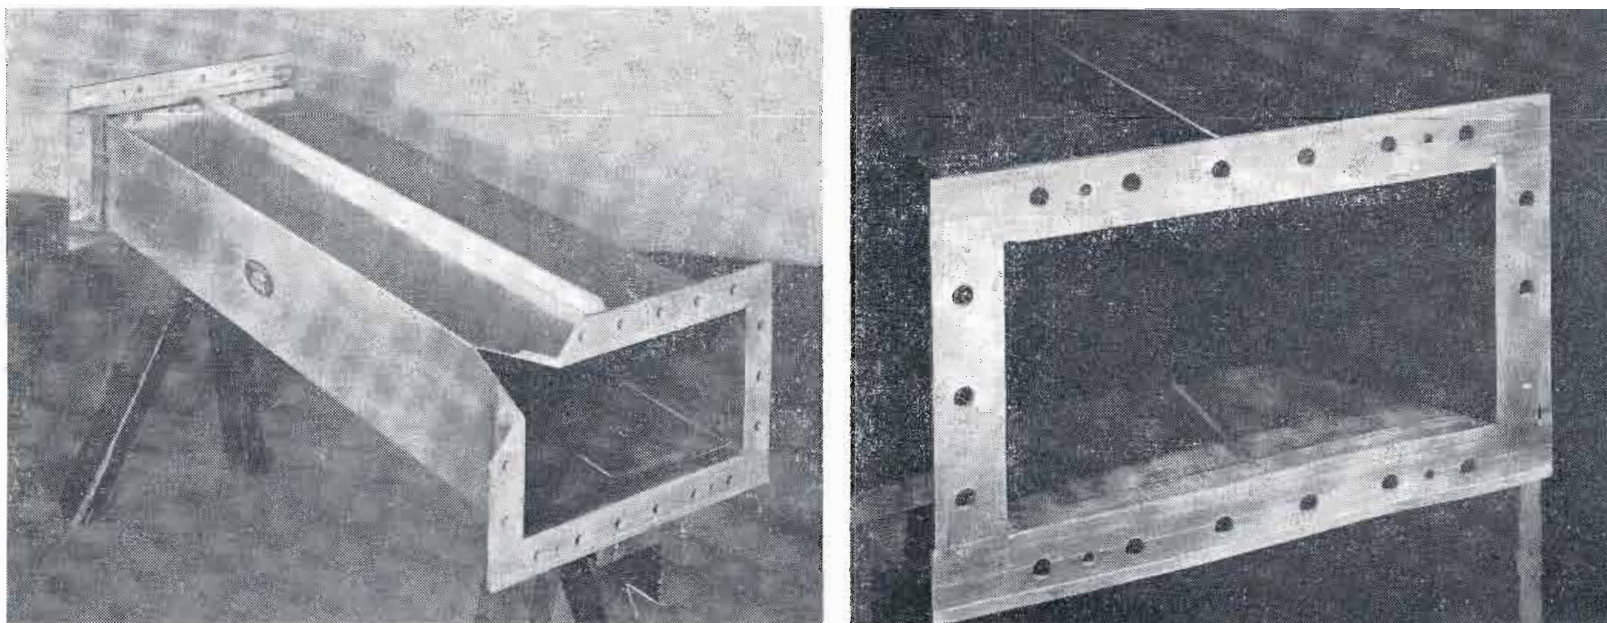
(l) Waveguide section made from copper-clad steel sheet. Note spot-welded seam. Fig. 3: (r) Flange for connecting 10-ft. guide sections
